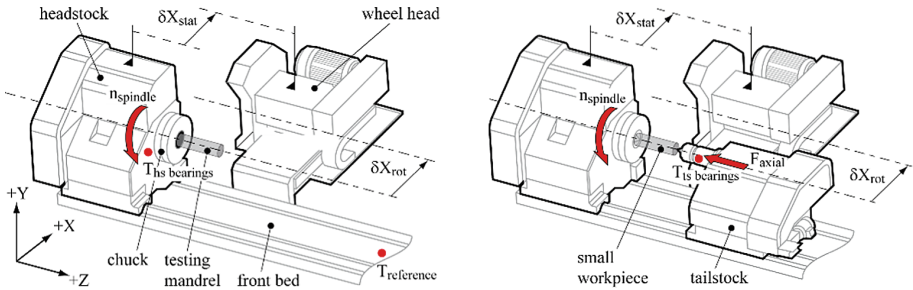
Schema of the experimental setup with headstock activity during rotation of the clamped testing mandrel (left) and with clamped small workpiece (right).
